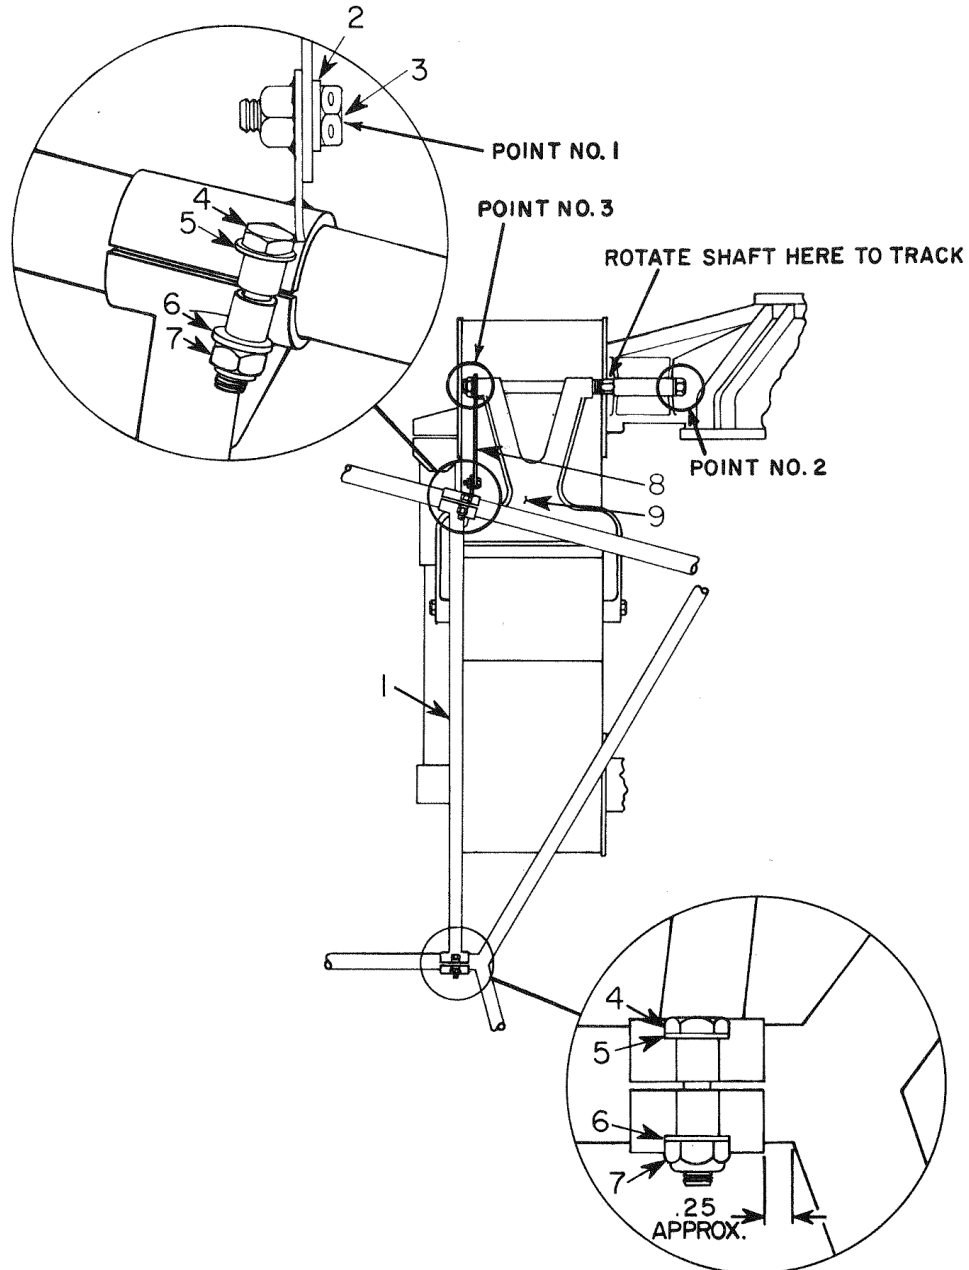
Idler Stabilizer and Belt Tracking Adjustment Points
